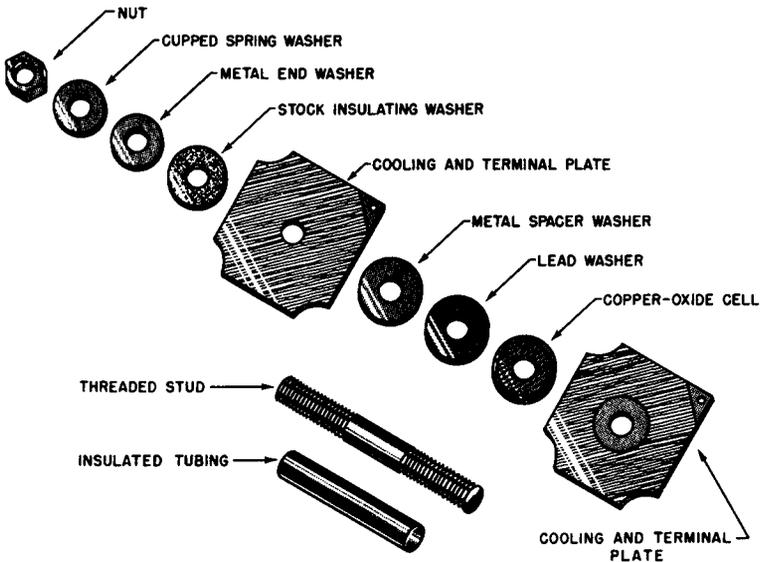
Elements of a Copper-Oxide Rectifier Stack Assembly.
